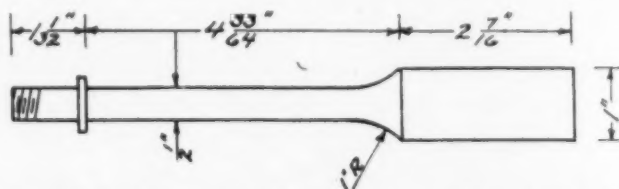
Sketch of Specimen Used in Rotating Beam Testing Machine.
